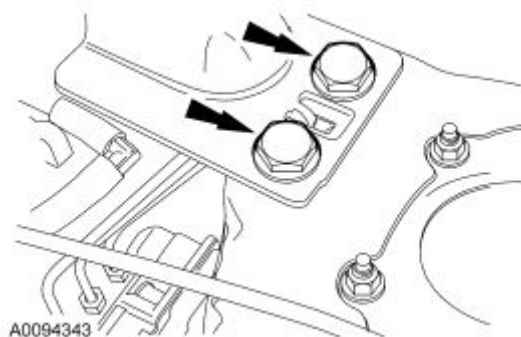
Identifying Transaxle Roll Restrictor Bar Bolts
